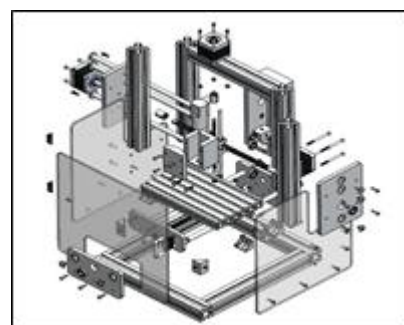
Exploded View of the Proposed Portable CNC Milling Machine
